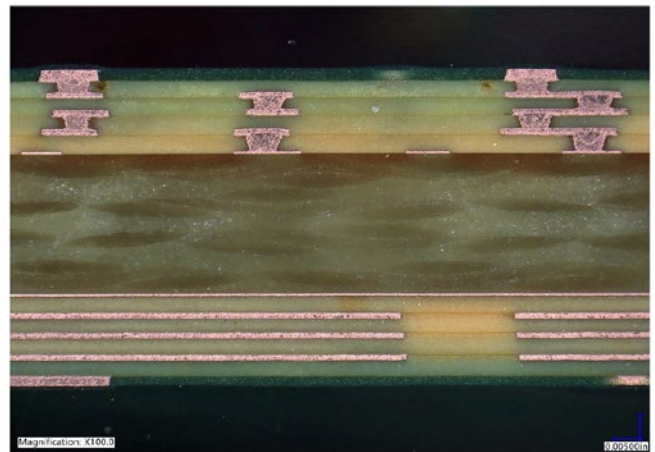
Cross-sectional image showing the flatness of a four-copper layer printed wiring board manufactured using only a non-reinforced bonding material.
